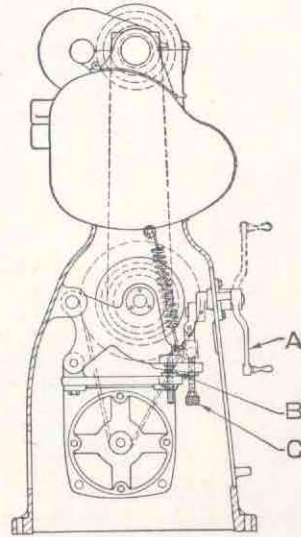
Underneath Motor Drive Arrangement for 10" and Larger Floor Type Lathes
